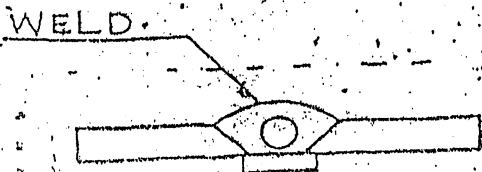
(b): LOCATION OF TENSILE TEST PIECE
